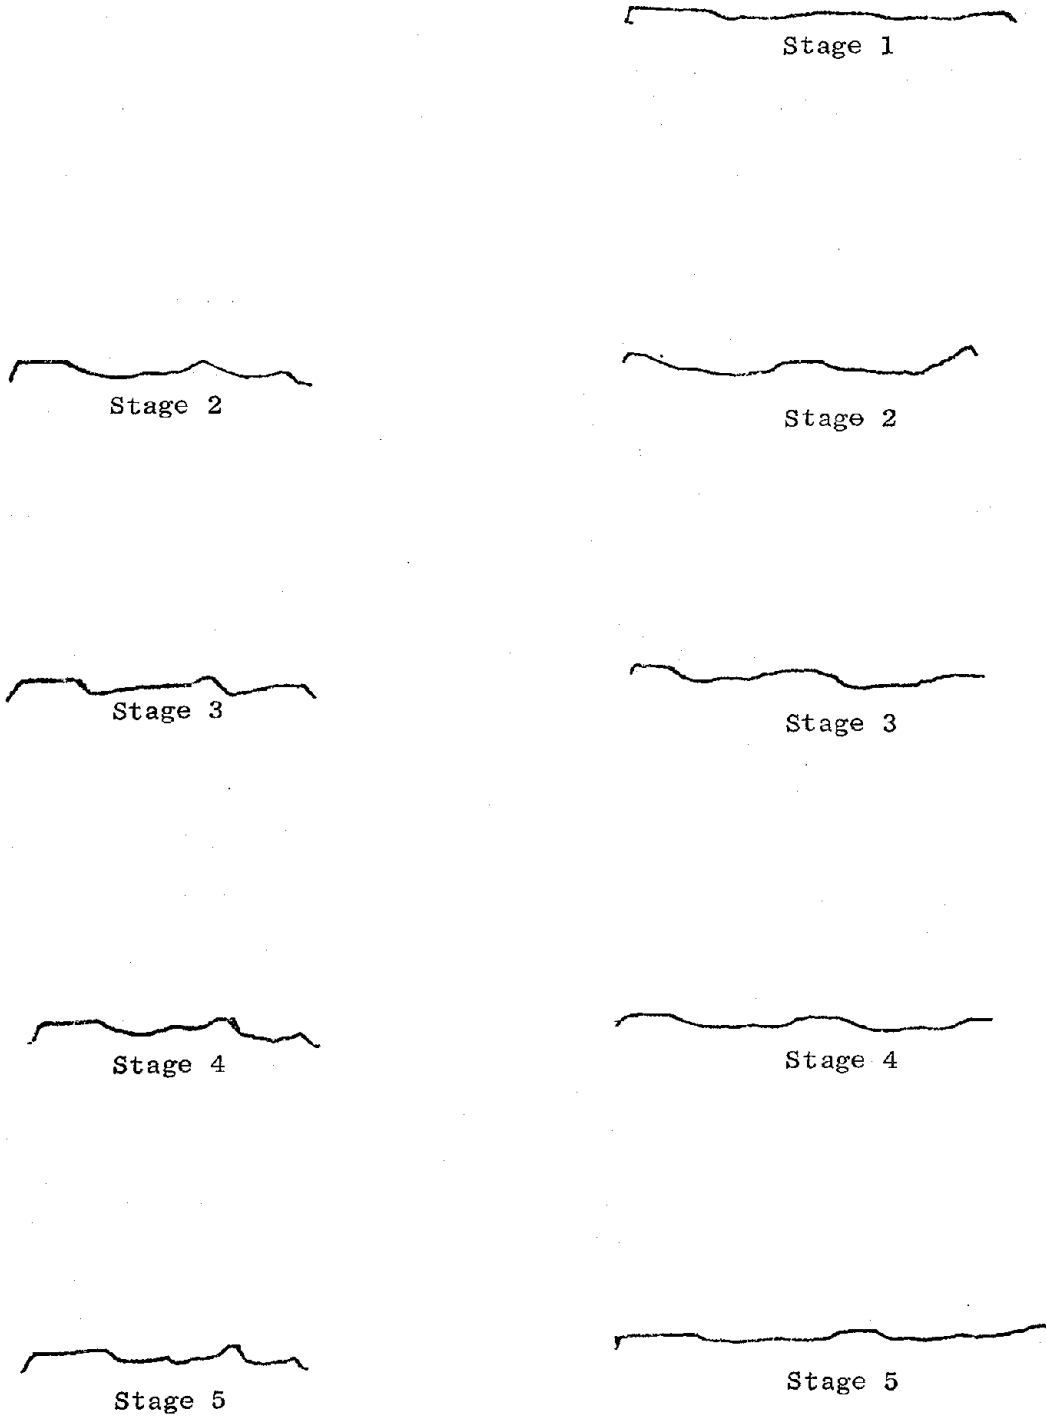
LPTS Shroud and Interstage Seal Rub Impressions.
